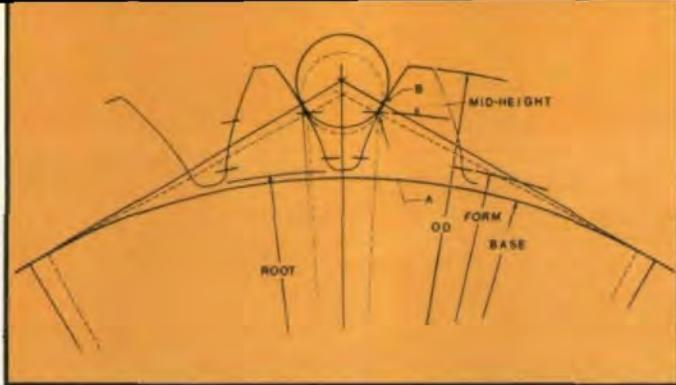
In selecting the measuring ball size for a full depth gear tooth, the next standard increment larger than the exact size is usually satisfactory.
